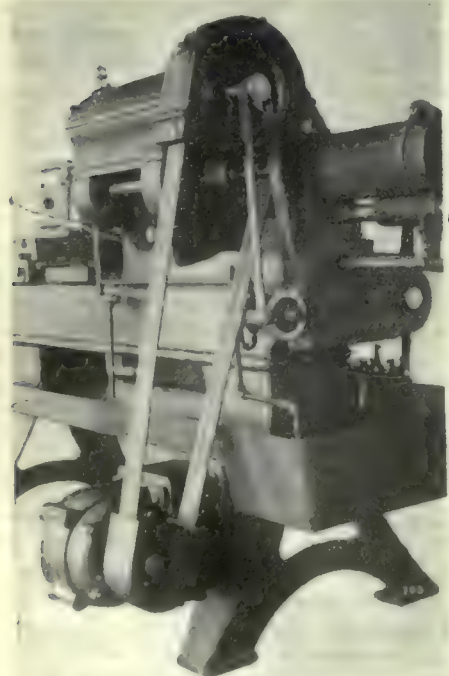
REAR VIEW SHOWING BELTED MOTOR DRIVE WITH GUARDS.
